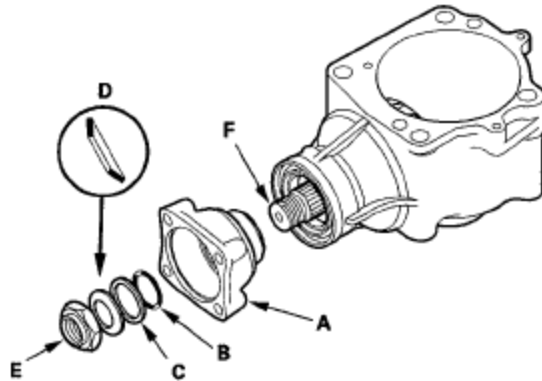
Identifying Companion Flange, O-Ring, Back-Up Ring, Conical Spring Washer And Locknut
